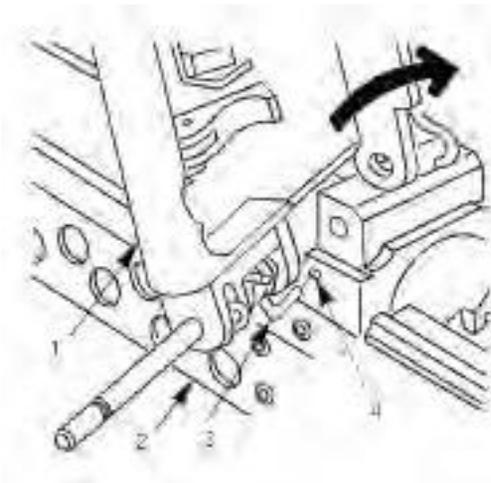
Receiver Assembly, Feed Mechanism Assembly, Headless Pin
